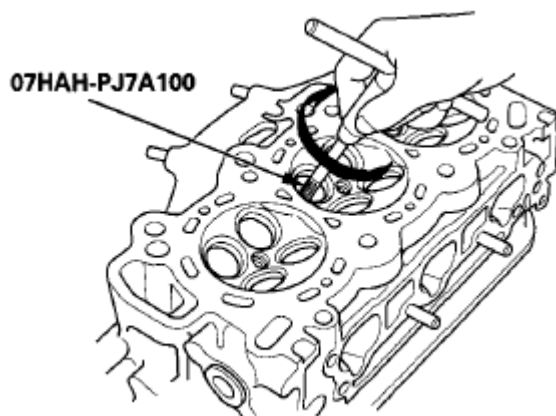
Rotating Reamer Clockwise Full Length Of Valve Guide Bore
